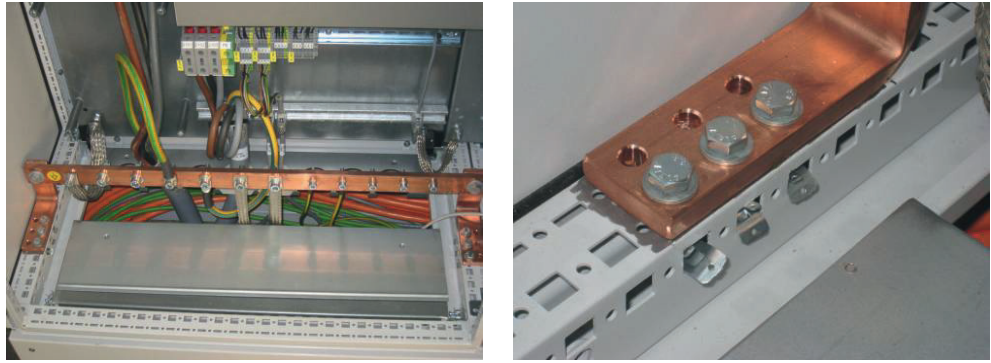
Low-impedance connection due to large design and well-conducting surfaces (coating may have to be removed)
